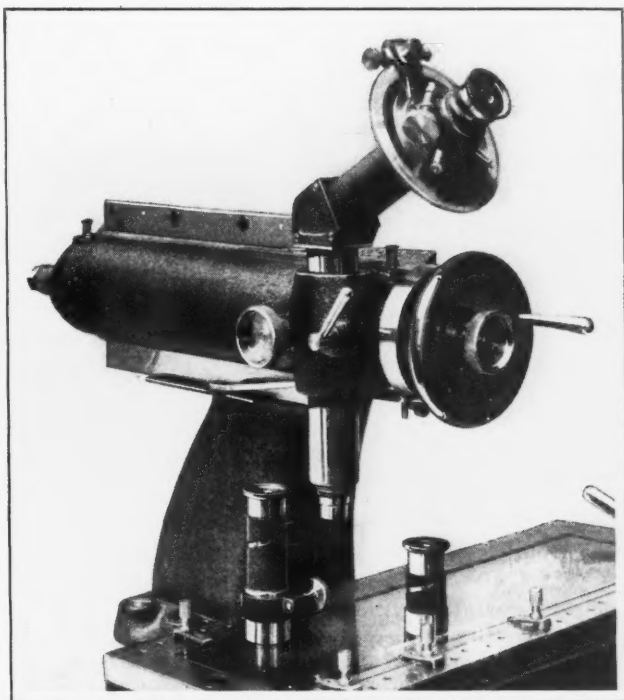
Goniometric Eye-piece for Measuring Angles with the Machine Shown in Fig. 1
